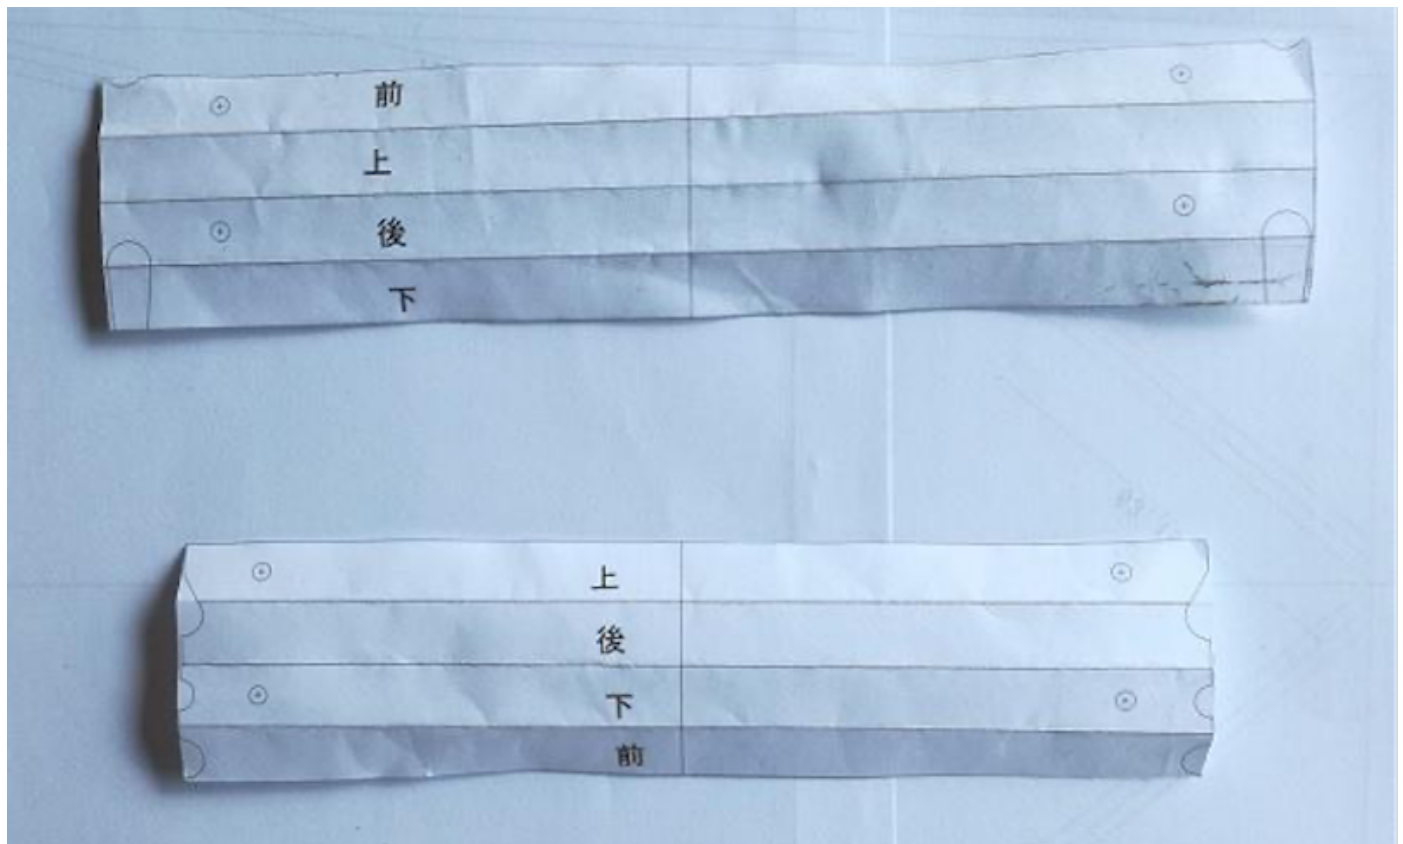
Development view drawings of the main wing attachment crossbeams cut out.
